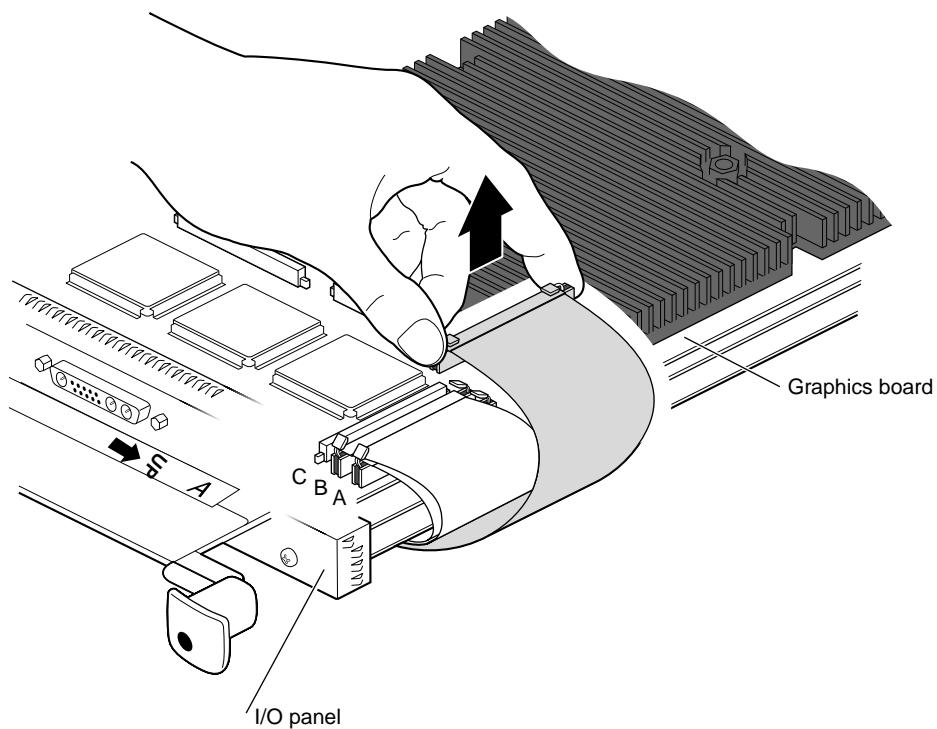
Releasing the Flex Cables From the Graphics Board
